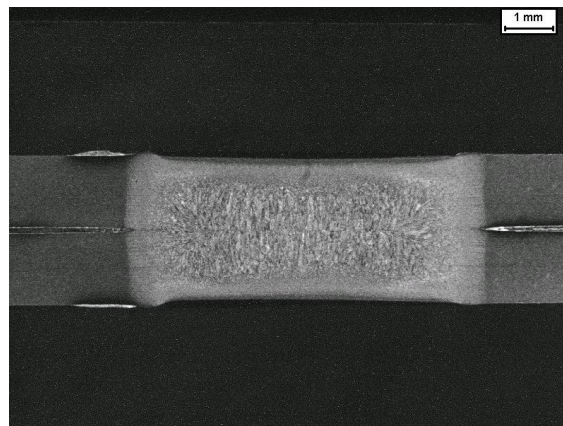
Resistance spot welded joint between two sheets of 1,0 mm thick DC01 steel. Welds made with a weld current of 8,45 kA, applied during 0,220 s. Electrode force 3,1 kN.
